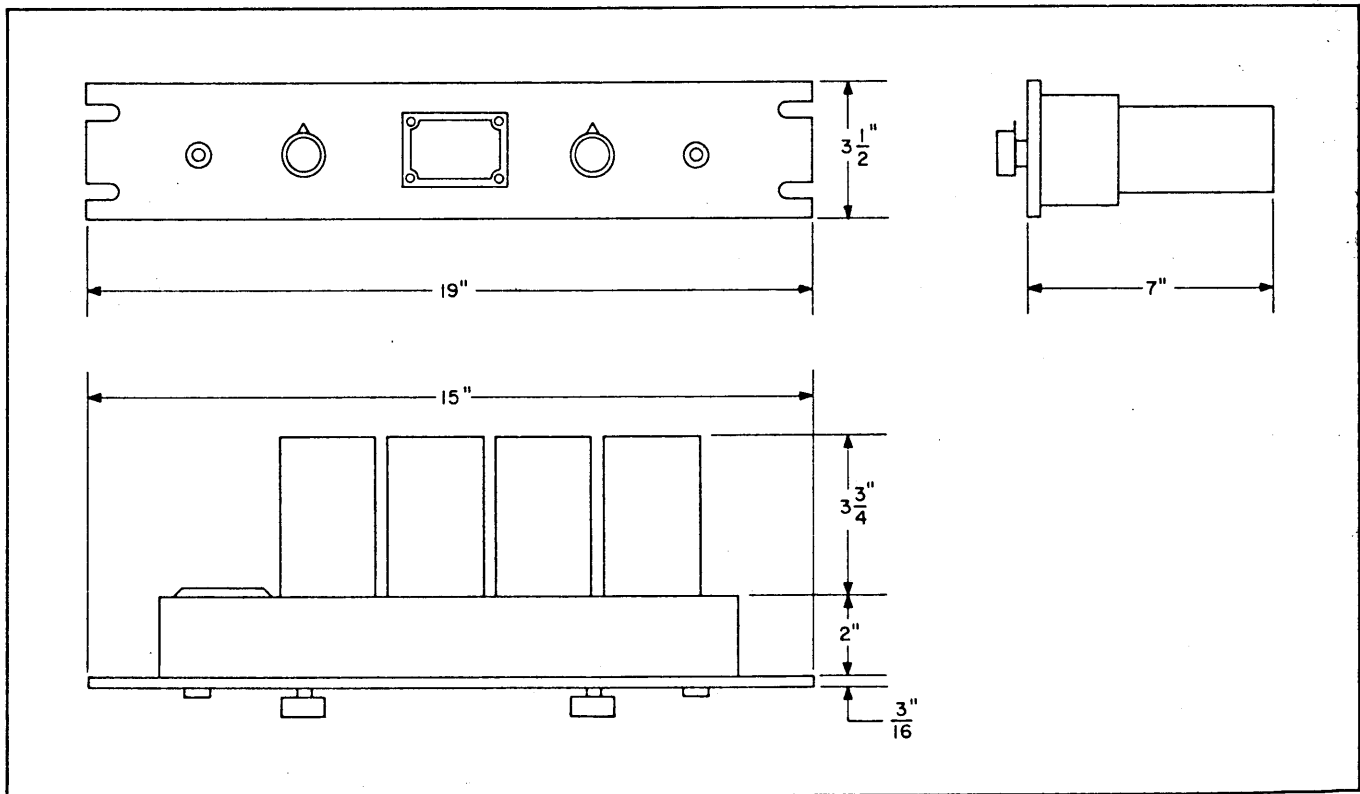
Outline Dimensional Drawing, Model SFP-2
